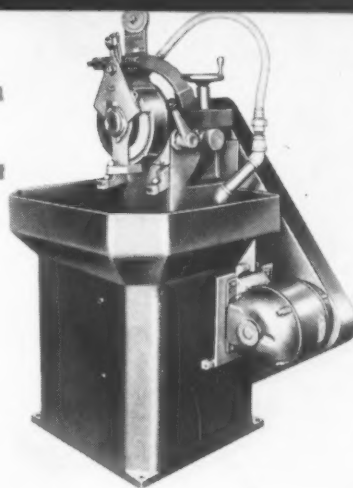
(Right) Oliver Smaller Size Tool Grinder for Grinding or Polishing Single-point Tools
